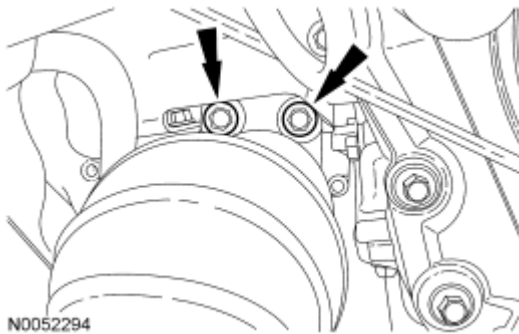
Locating RH Halfshaft Bearing Support Bracket Bolts
